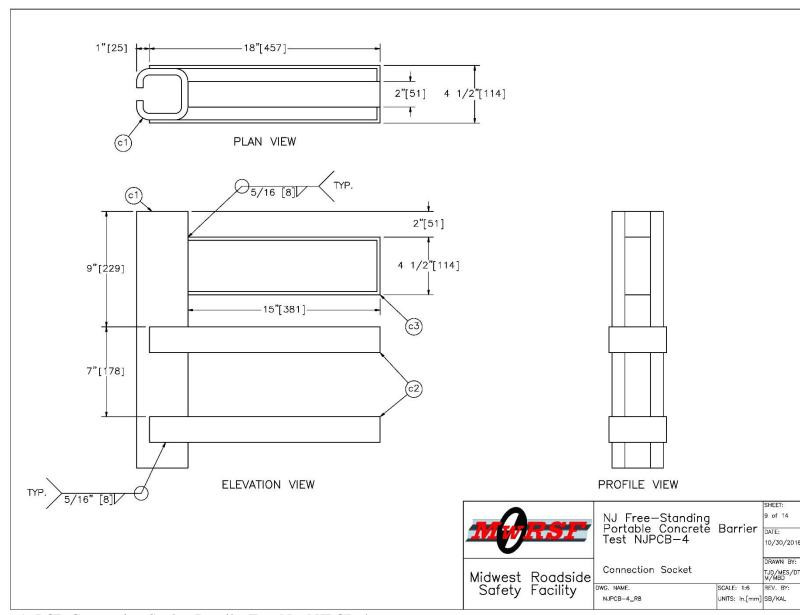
PCB Connection Socket Details, Test No. NJPCB-4
